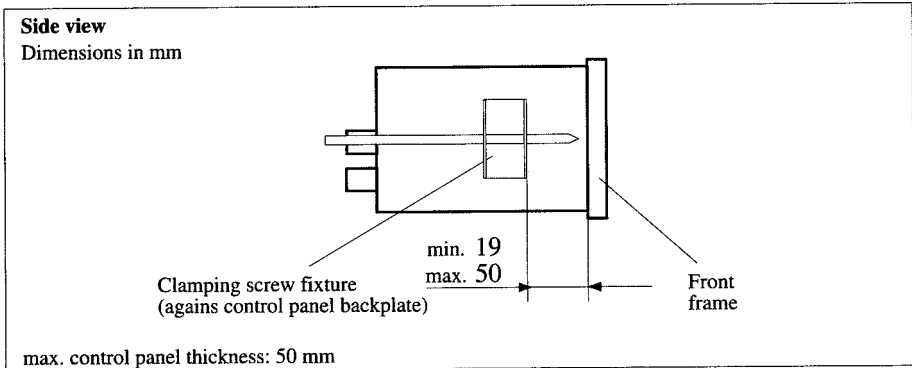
DAA 288-120/240 mounting dimensions, side view
